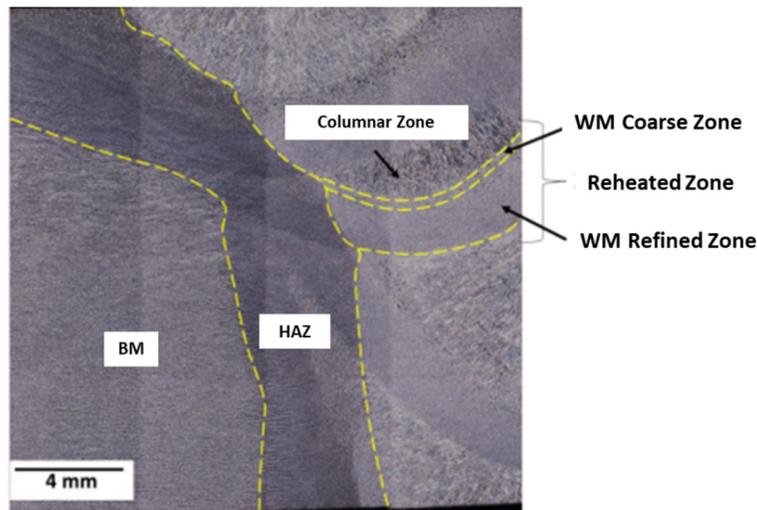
Macrograph of HTP76 welded joint. BM: base metal, HAZ: heat affected zone, WM: weld metal.
